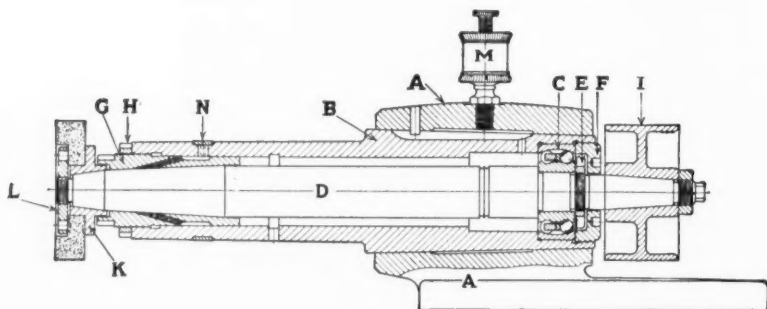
Details of a typical drip-oiled spindle bearing on a grinding machine. Note the S. K. F. self-aligning ball bearing, "C". A sight feed oiler "M" serves as the primary means of lubrication, along with a hand-oiler "N".
